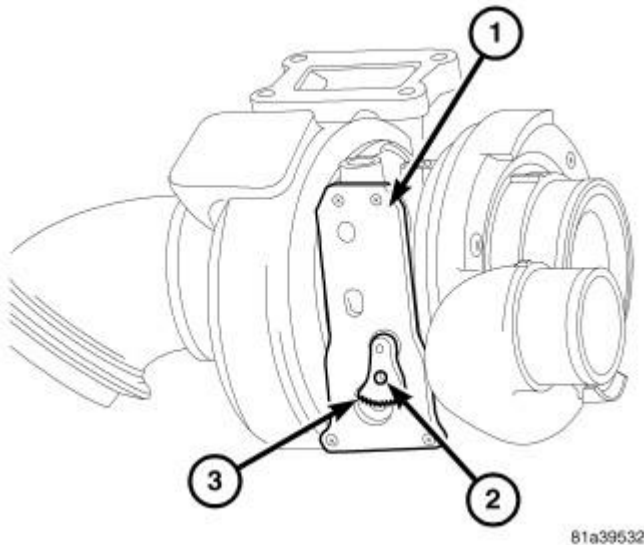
Variable Geometry Mechanism -- Sector Gear Checks
